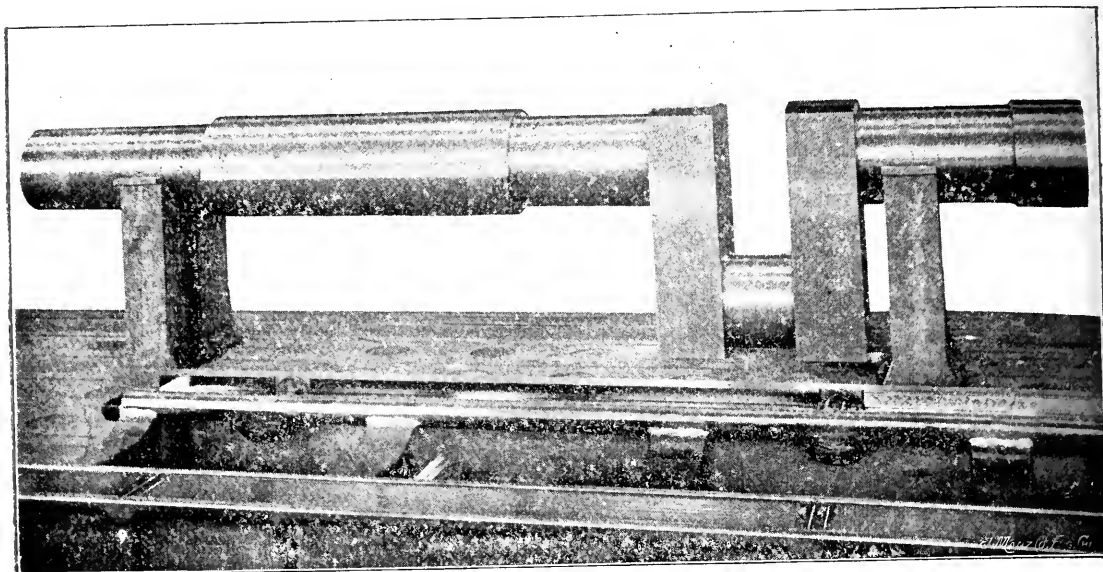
Crank Shaft for a 50 x 72-inch Reversing Engine for Jones & Laughlin; engine built by Mackintosh, Hemphill & Co., of Pittsburg, Pa. Diameter of boss, $28\frac{3}{8}$ in.; diameter of bearings, 24 in.; diameter of pin, 23 in.; diameter of bore, 6 in.; throw, 36 in.; total length of shaft, 22 ft. 11 in.; weight, 47,950 pounds.
